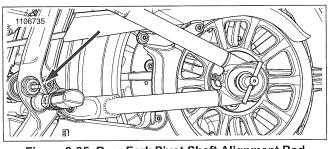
Rear Fork Pivot Shaft Alignment Rod
